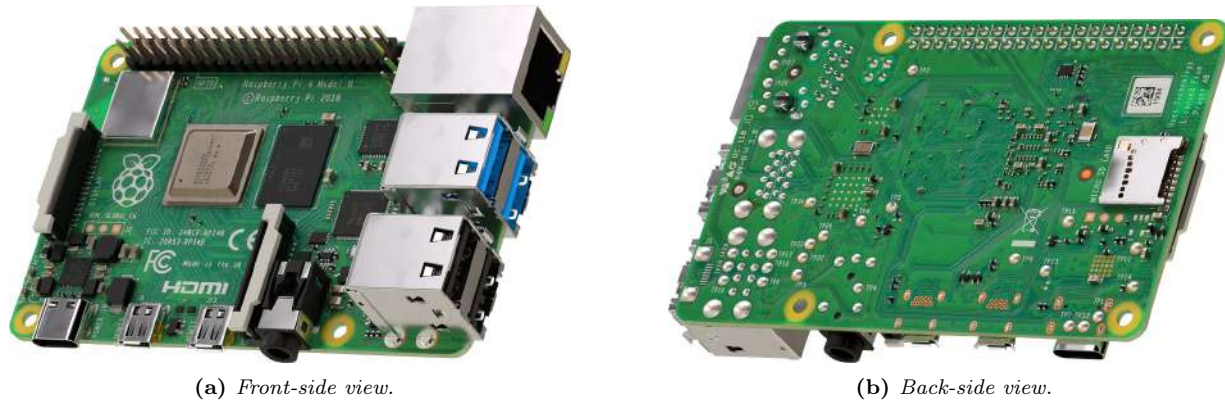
Raspberry Pi 4 Model B SBC. An example of a device with a multi-layer *Printed Circuit Board layer stackup*, green *solder mask*, an *mixed-technology* components; all in a standardized size, port layout and position of the *mounting hole* (the “model B” form factor). Images extracted from: [68].
